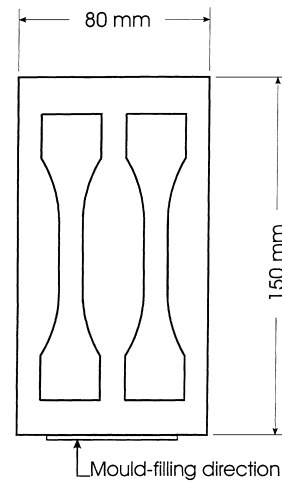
Schematic diagram showing the injection moulded plaque and the location of the tensile bars.
